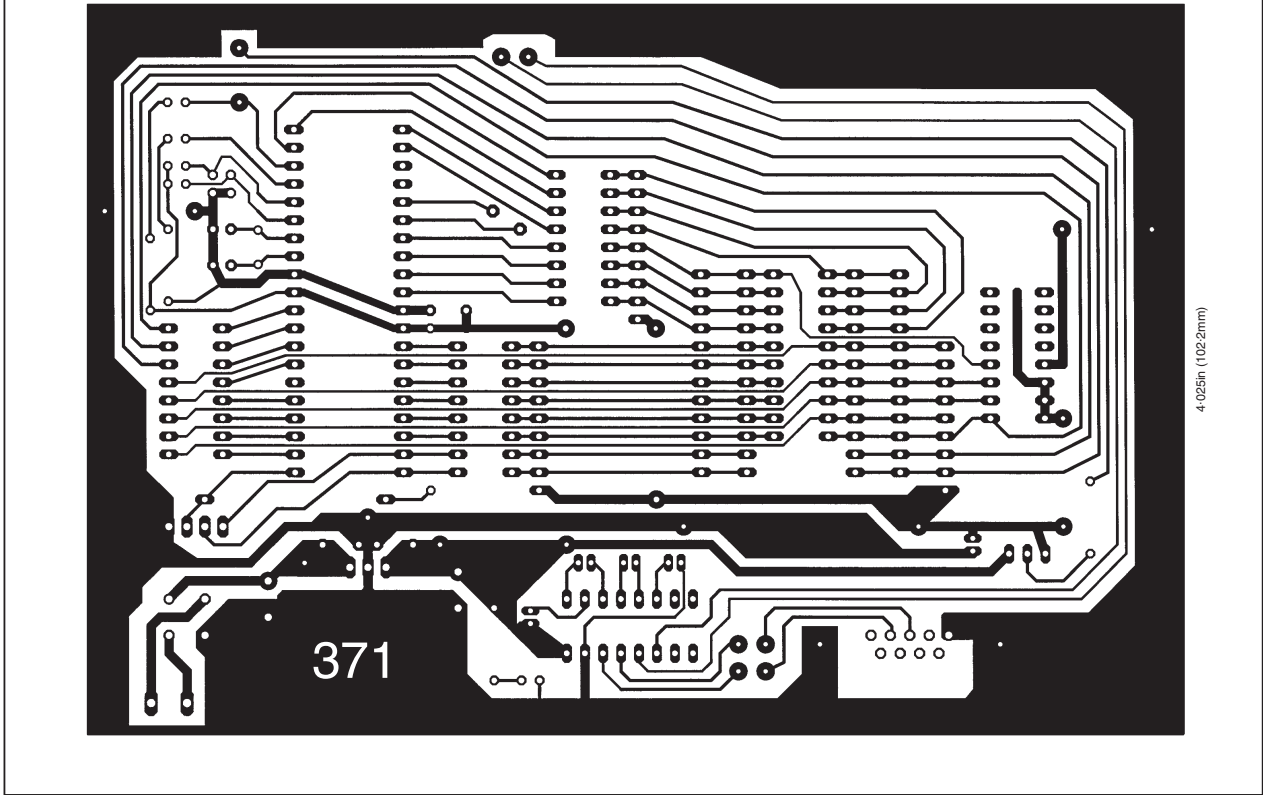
Printed circuit board component layout and full size copper foil master track pattern.
